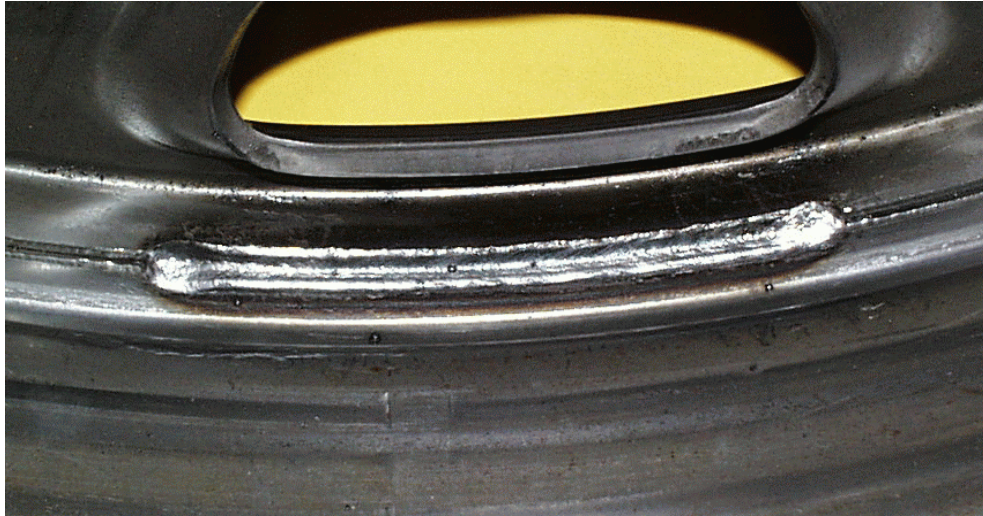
General view of the weld after Ultrasonic Peening
